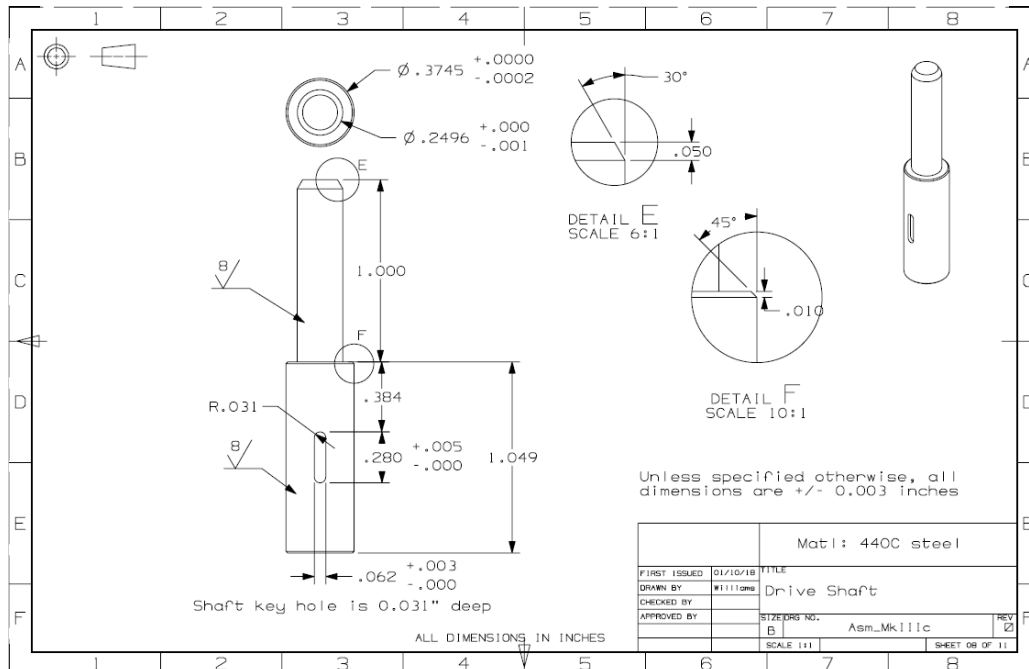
Example drive shaft fabrication drawings for miniature gear pump
